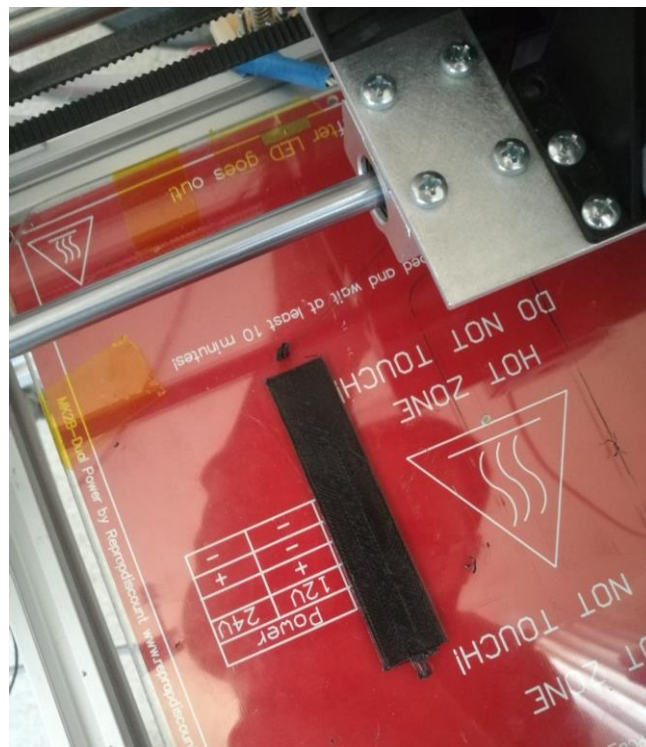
3D Printed Rectangular Shaped Conductive Layer.
